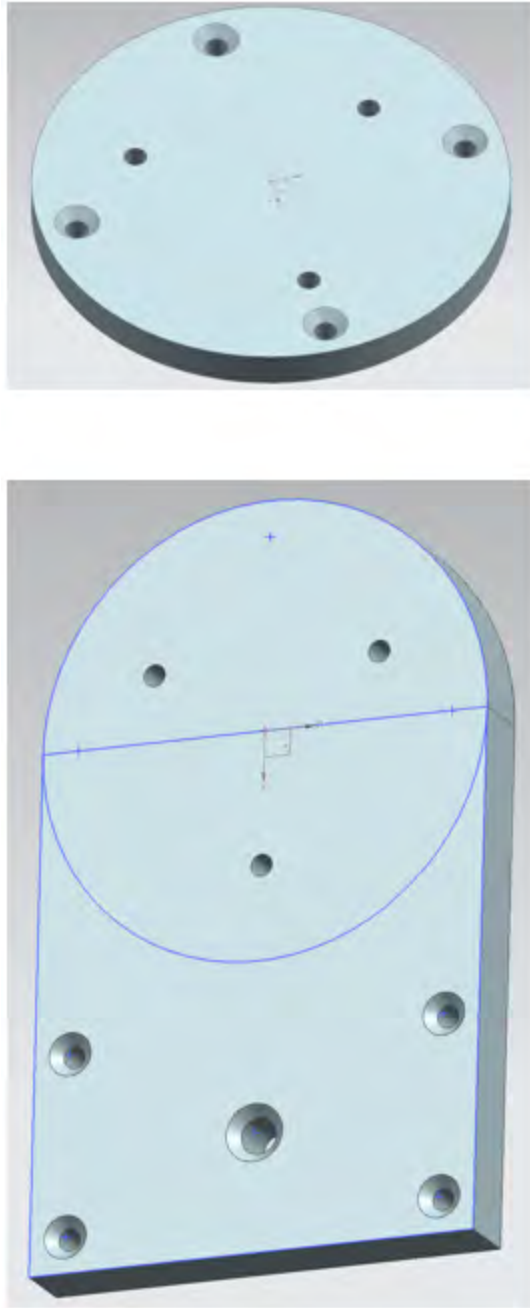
NX12 Sensor Adapters. Tool Side Adapter (top) / Mounting Side Adapter (bottom)
